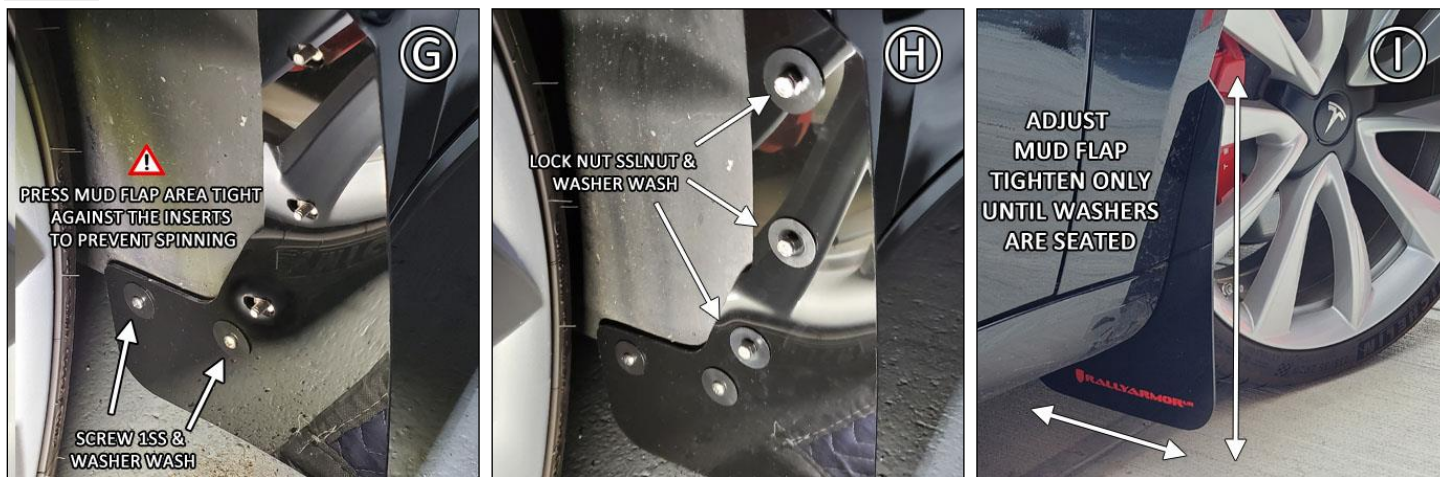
FIGURE G Logo-side of flap faces rear of vehicle against the corresponding mounting points onto BRACKET and fender. Install 2 STAINLESS STEEL SCREW 1SS with WASHER WASH onto upper respective mounting points. Press mud flap firmly against INSERT #5 to prevent spinning. Do not tighten completely.
